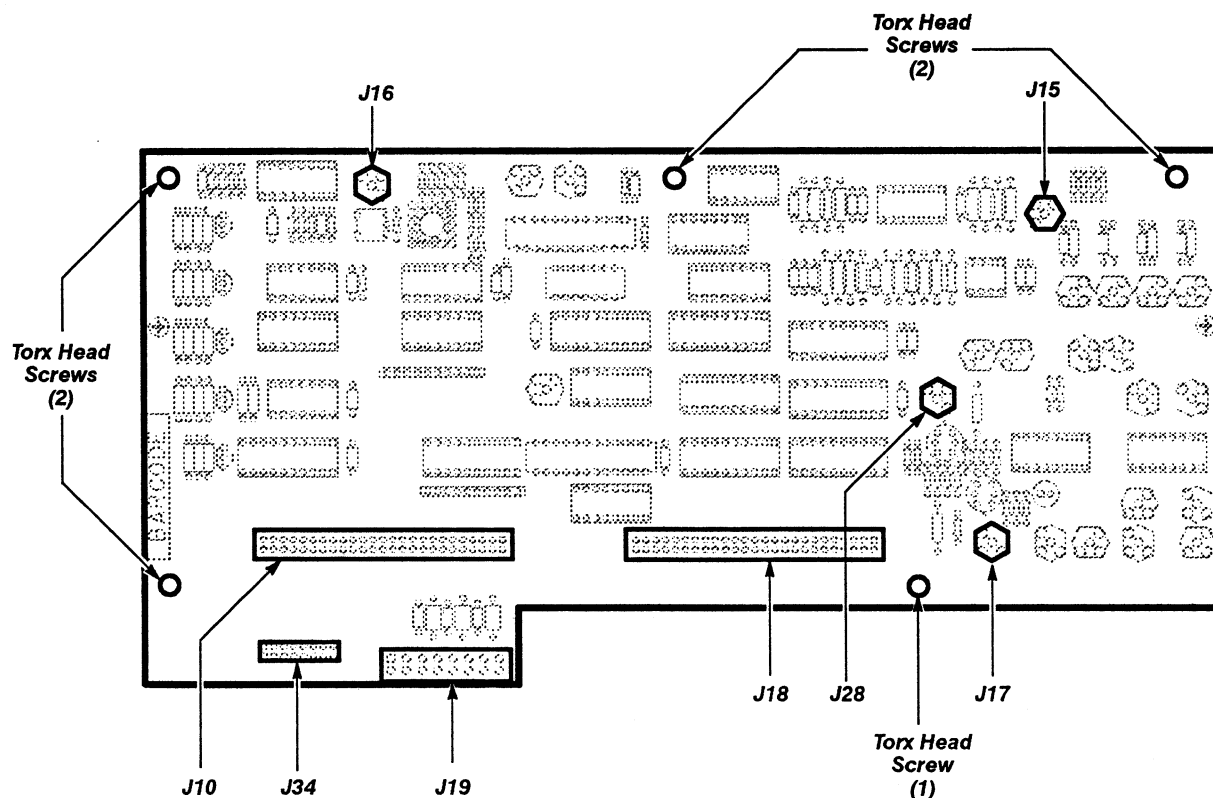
Removing and Replacing the A1 M/F Strobe Drive Board
